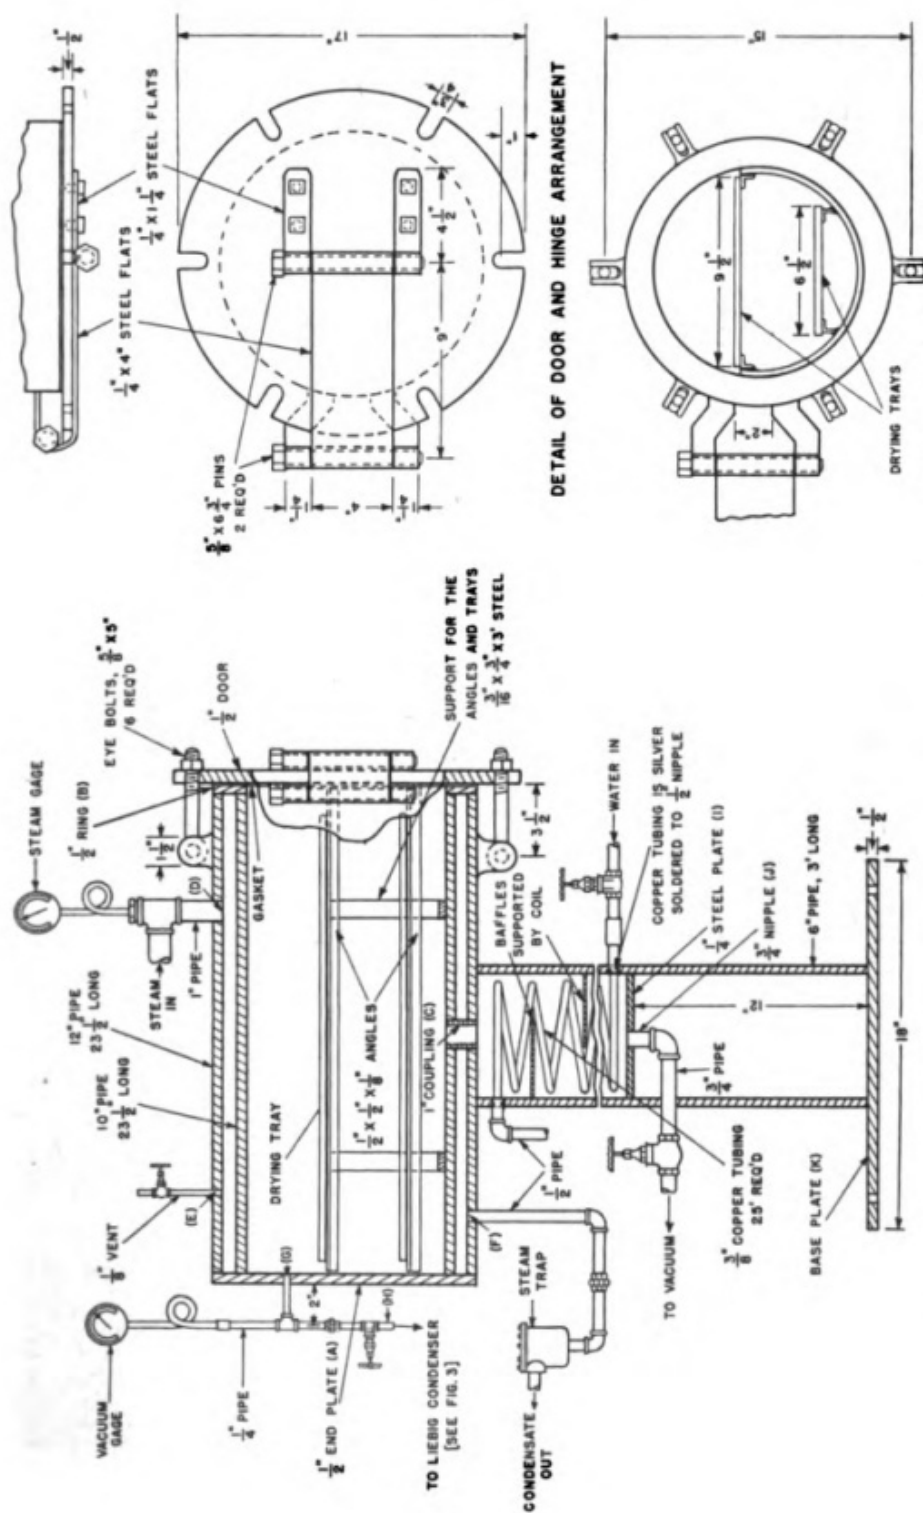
Assembly and Details of Vacuum Tray Drier—University of North Dakota
